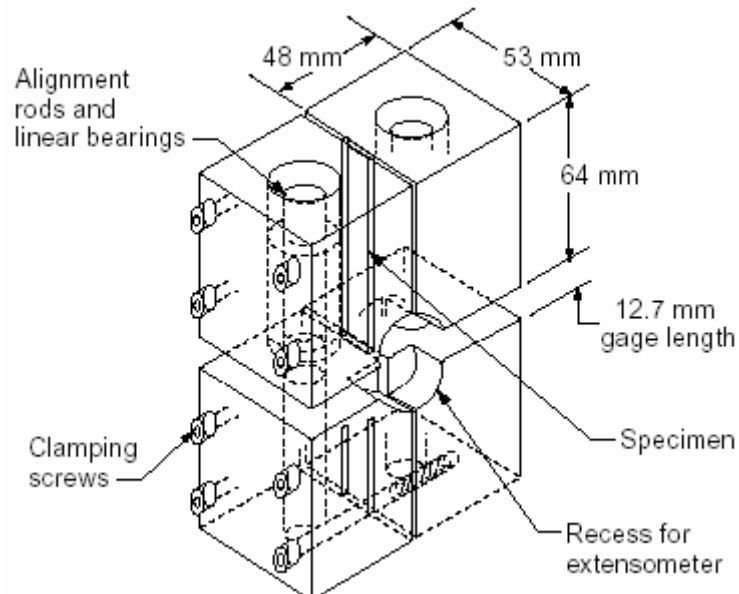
Combined loading compressive test fixture, taken from [66].
